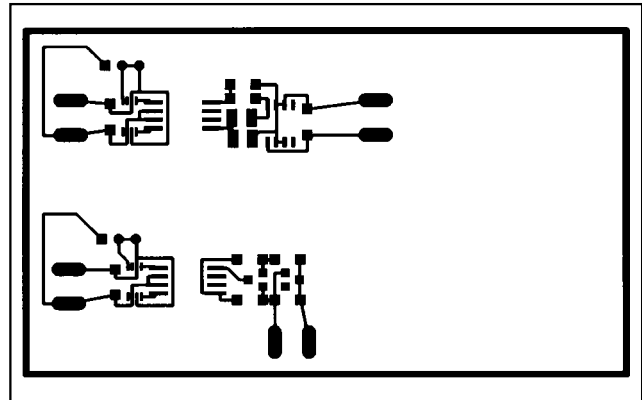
MAX845 EV Kit PC Board Layout—Component Side
